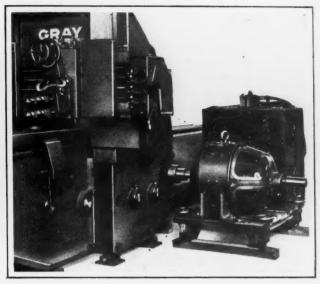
Reversing Motor and Controller Mounted on a Skid, Ready to be Connected to Planers for Testing
